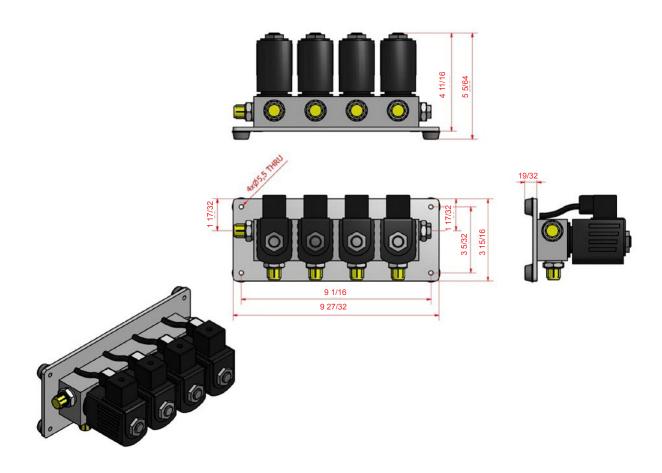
Valve block 3+1 INDUCT dimensions (in inch)
